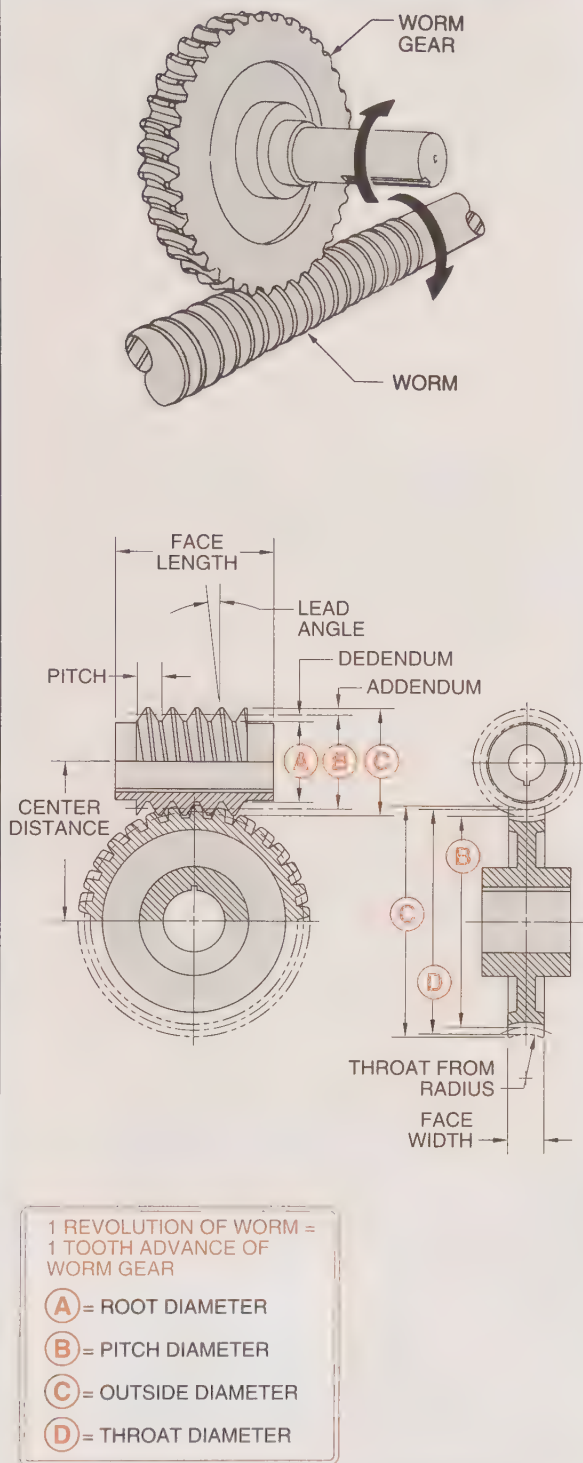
Worm gears are specified on the print with a section view detailing the gear teeth profile.
